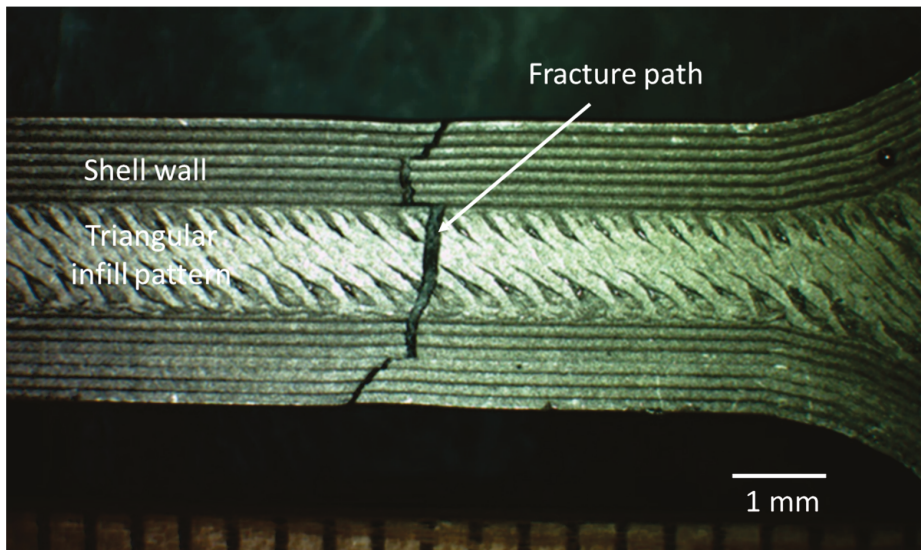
Striation-like features on the sample surface, together with fracture line and tool path (specimen: MF, TRI, 2 SHELL).
